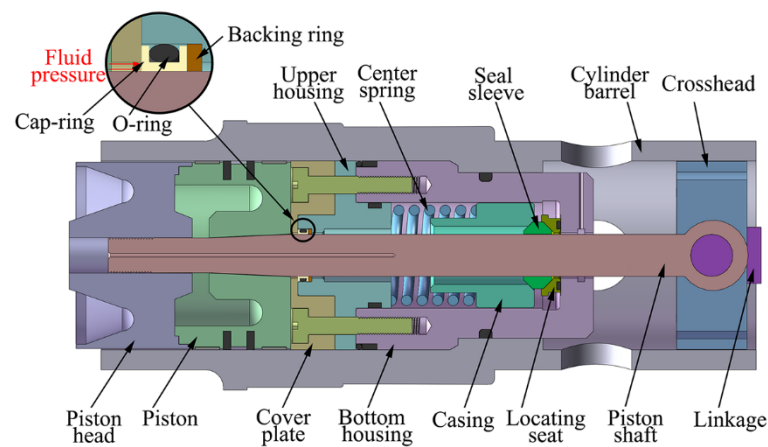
Schematic diagram of piston rod seal structure of Stirling engine.
